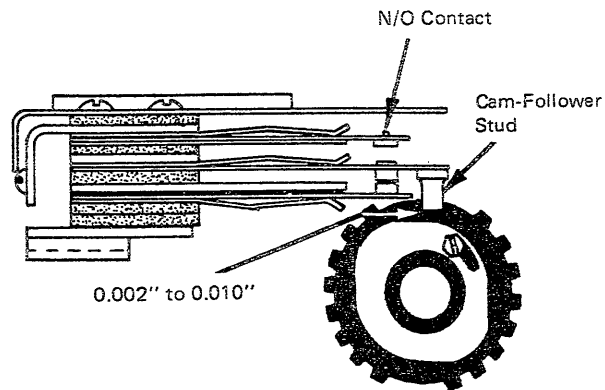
C-7 Shift-Contact Assembly (835 and 2152)
